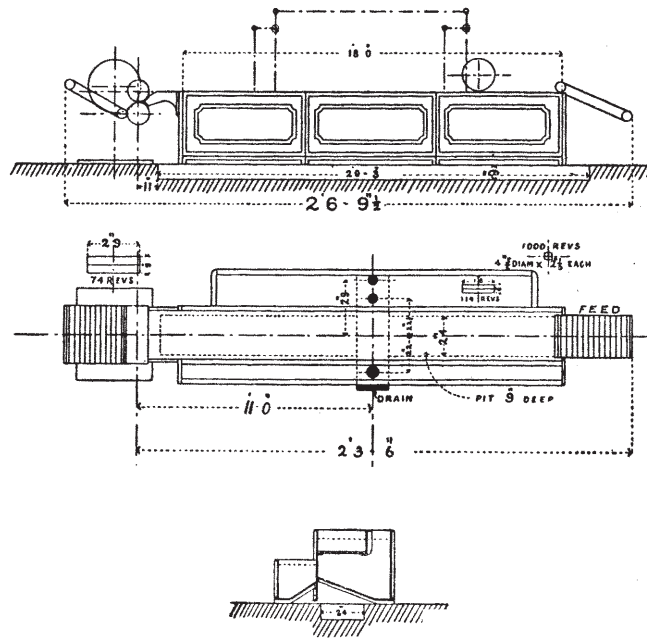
Plan, Elevation and Section of McNought's Washing Machine
